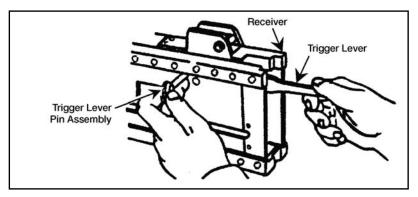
Removal of the trigger lever pin assembly and trigger lever
